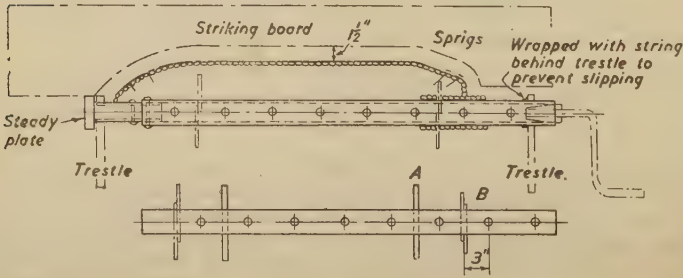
Foundry No. 3. Core-making for thin-walled steel castings.
